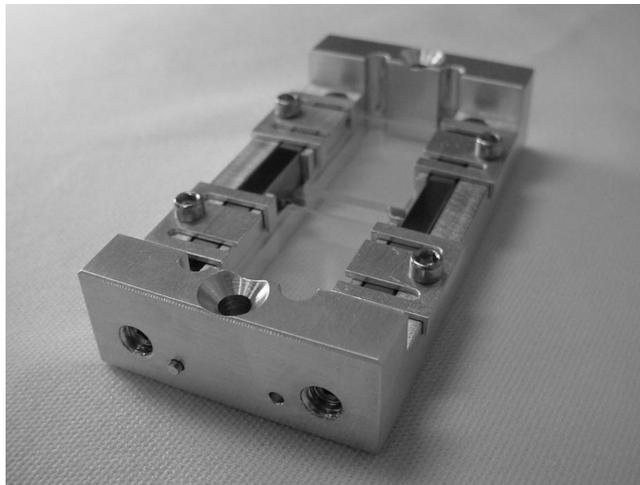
Mechanical frame shown with two separate PTC VBG elements. Four clamps shown are used to secure the location once adjustment with differential screw is performed.
